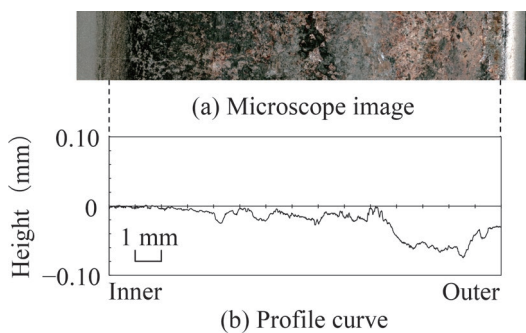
Microscope image and corresponding profile curve of prototype backing ring side face after rotation test (enlarged image of section indicated with red mark in Fig. 14)
